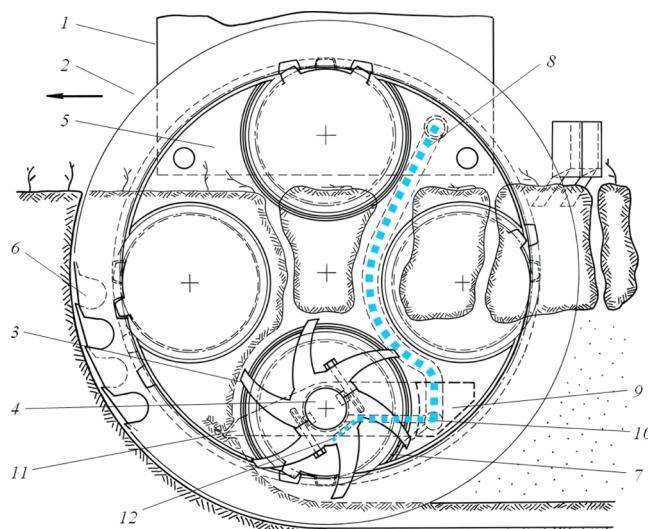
Device for intrasoil milling and simultaneous intrasoil application of substances, side view. 1—frame; 2—vertical rotational chisel; 3—milling cutters; 4—shaft; 5—disk; 6—ring cutter; 7—pinion; 8—channel; 9—ramp; 10—channel; 11—soil loosening finger; and 12—channel.
